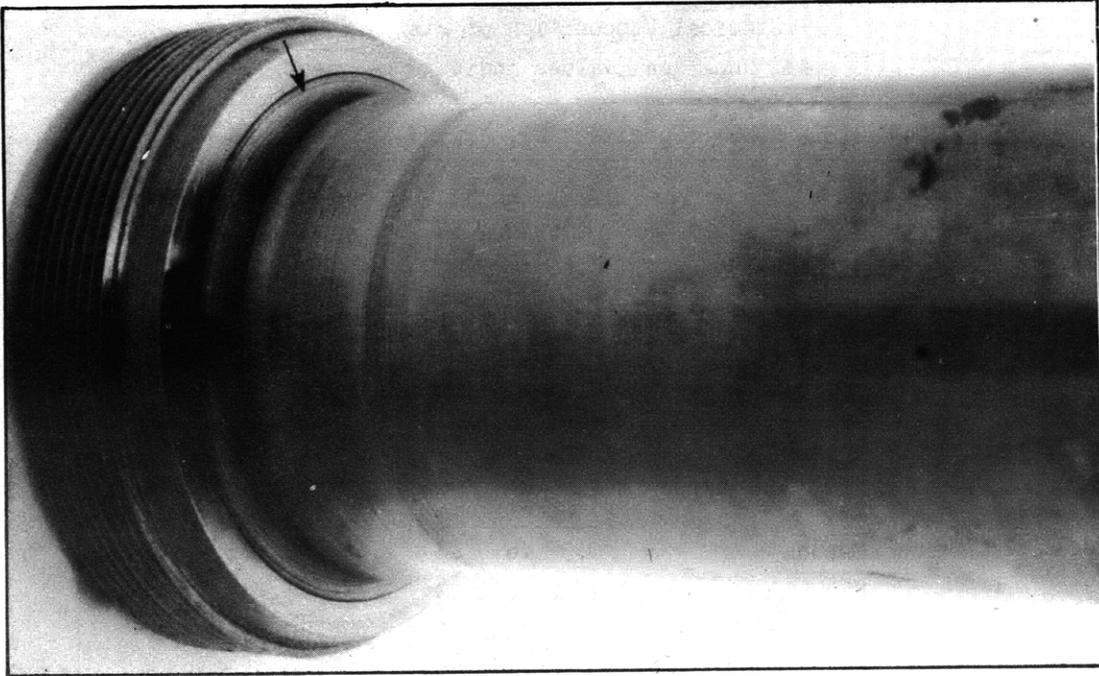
Piston End of Specimen without Metal Coating before Testing
